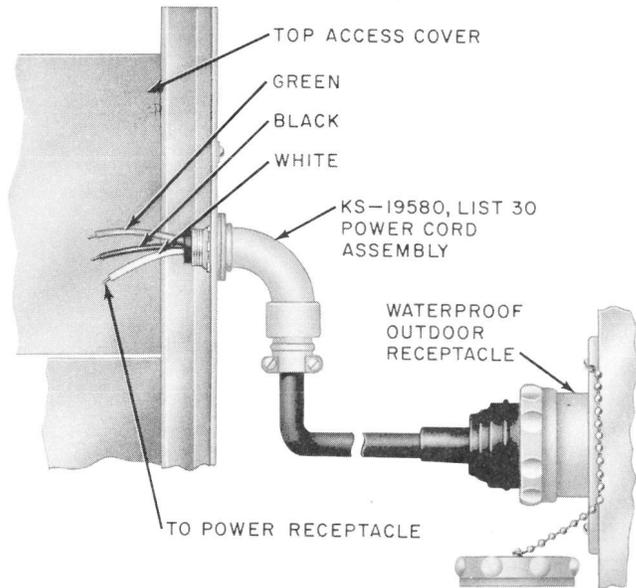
KS-19580, List 30 Power Cord Assembly Overhead Entrance
